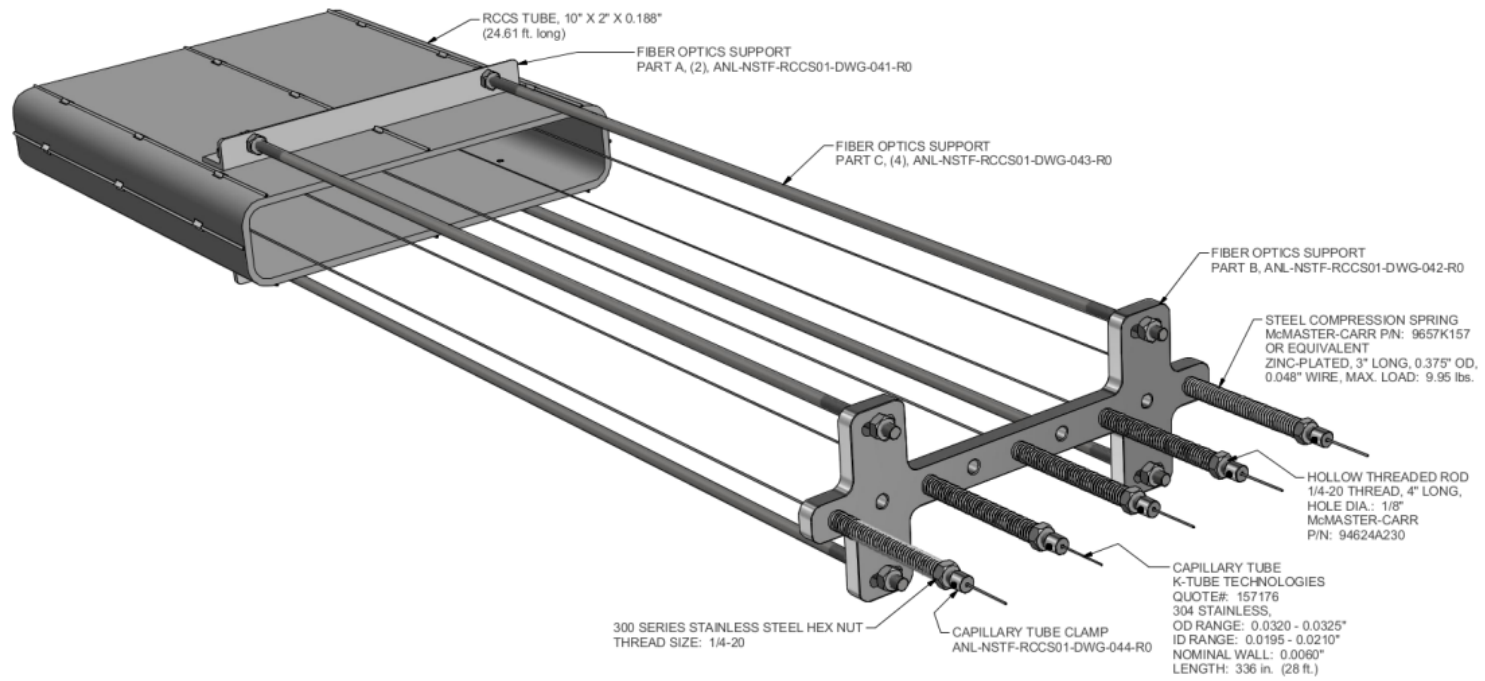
Riser #9, SuperDuct 2.0, gas fiber mounting method
